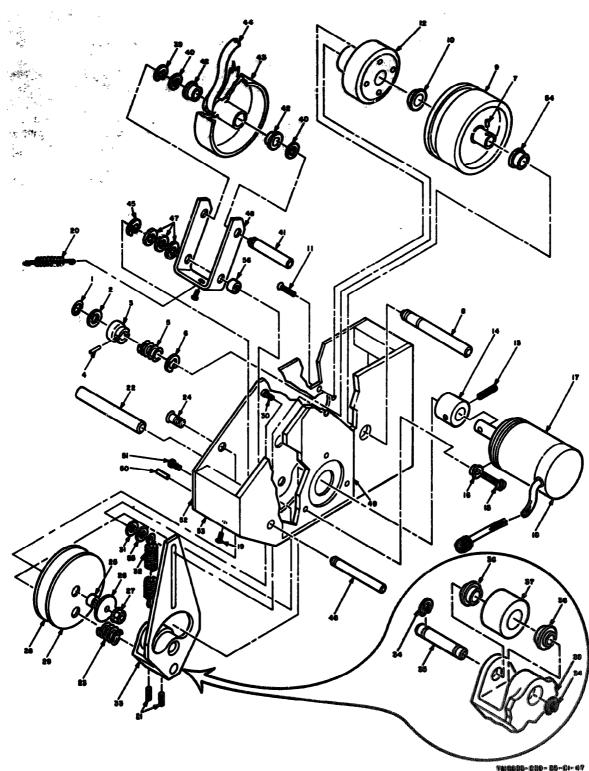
A1A7 variable speed tape drive transmission assembly, exploded view.
